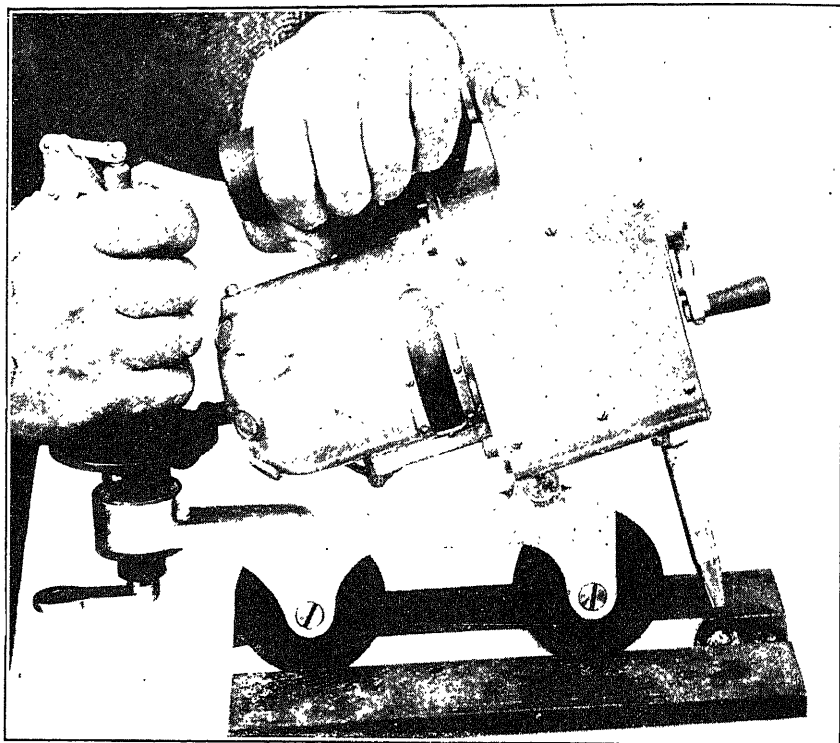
Morton Semi-Automatic Metallic-Electrode Arc-Welding Machine.
